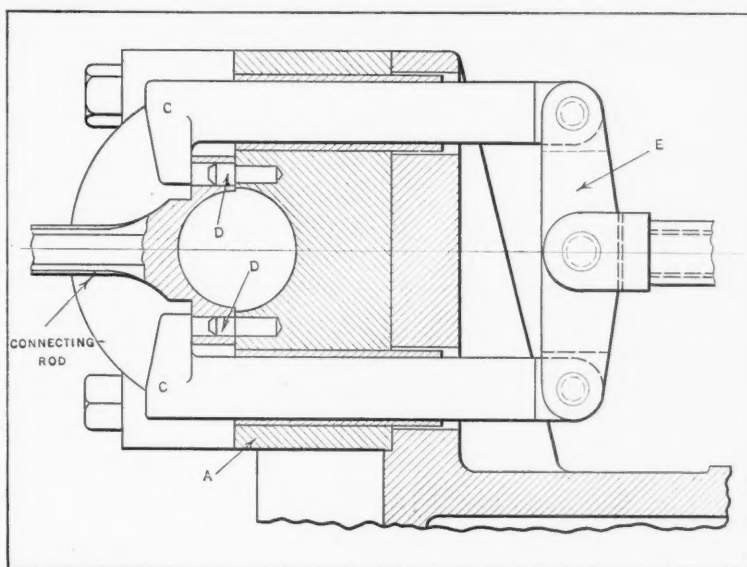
Sectional Drawing which Illustrates the Manner in which Connecting-rods or Caps are Held to Block A, Fig. 3
